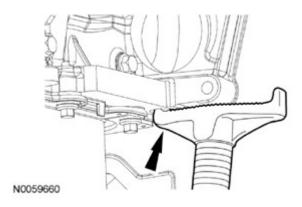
Raising Engine Using Jack Courtesy of FORD MOTOR CO.
